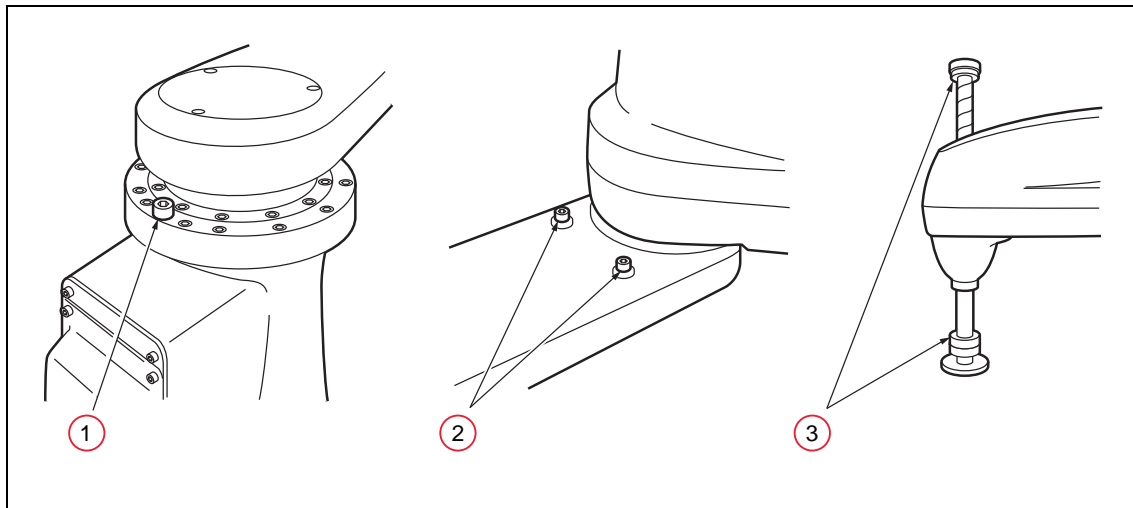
Mechanical End Bolts and Stoppers on Robot
